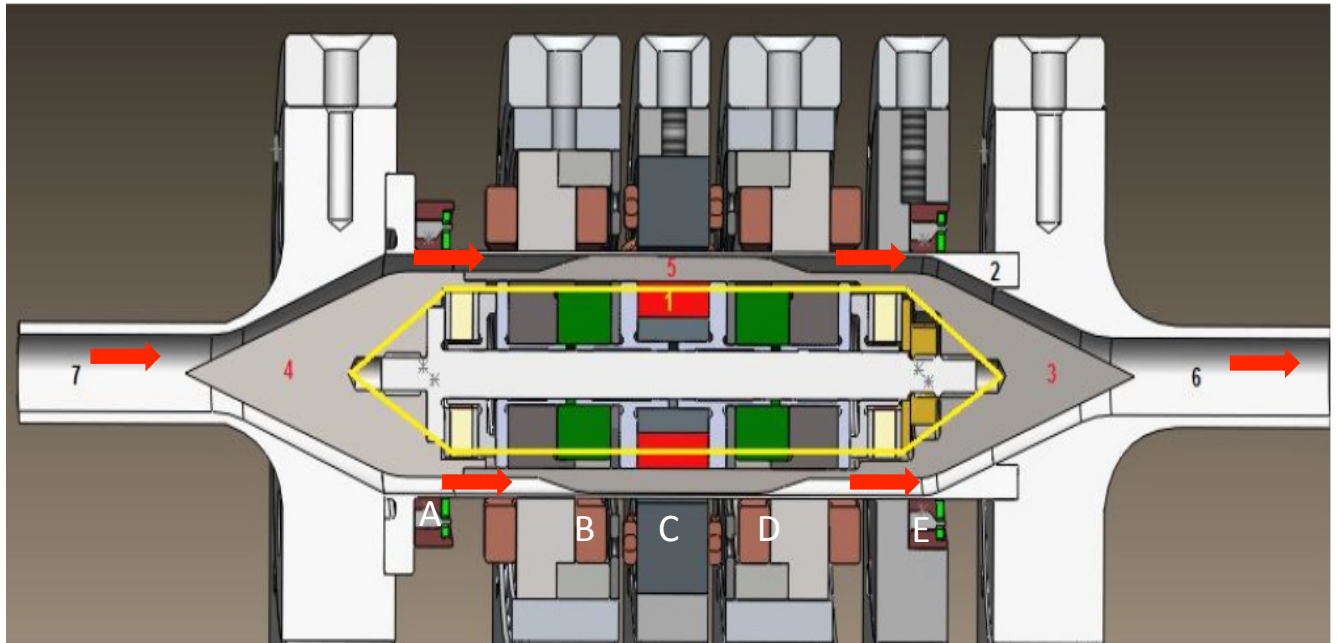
Cross sectional view of the Maglev shearing device¹⁹
